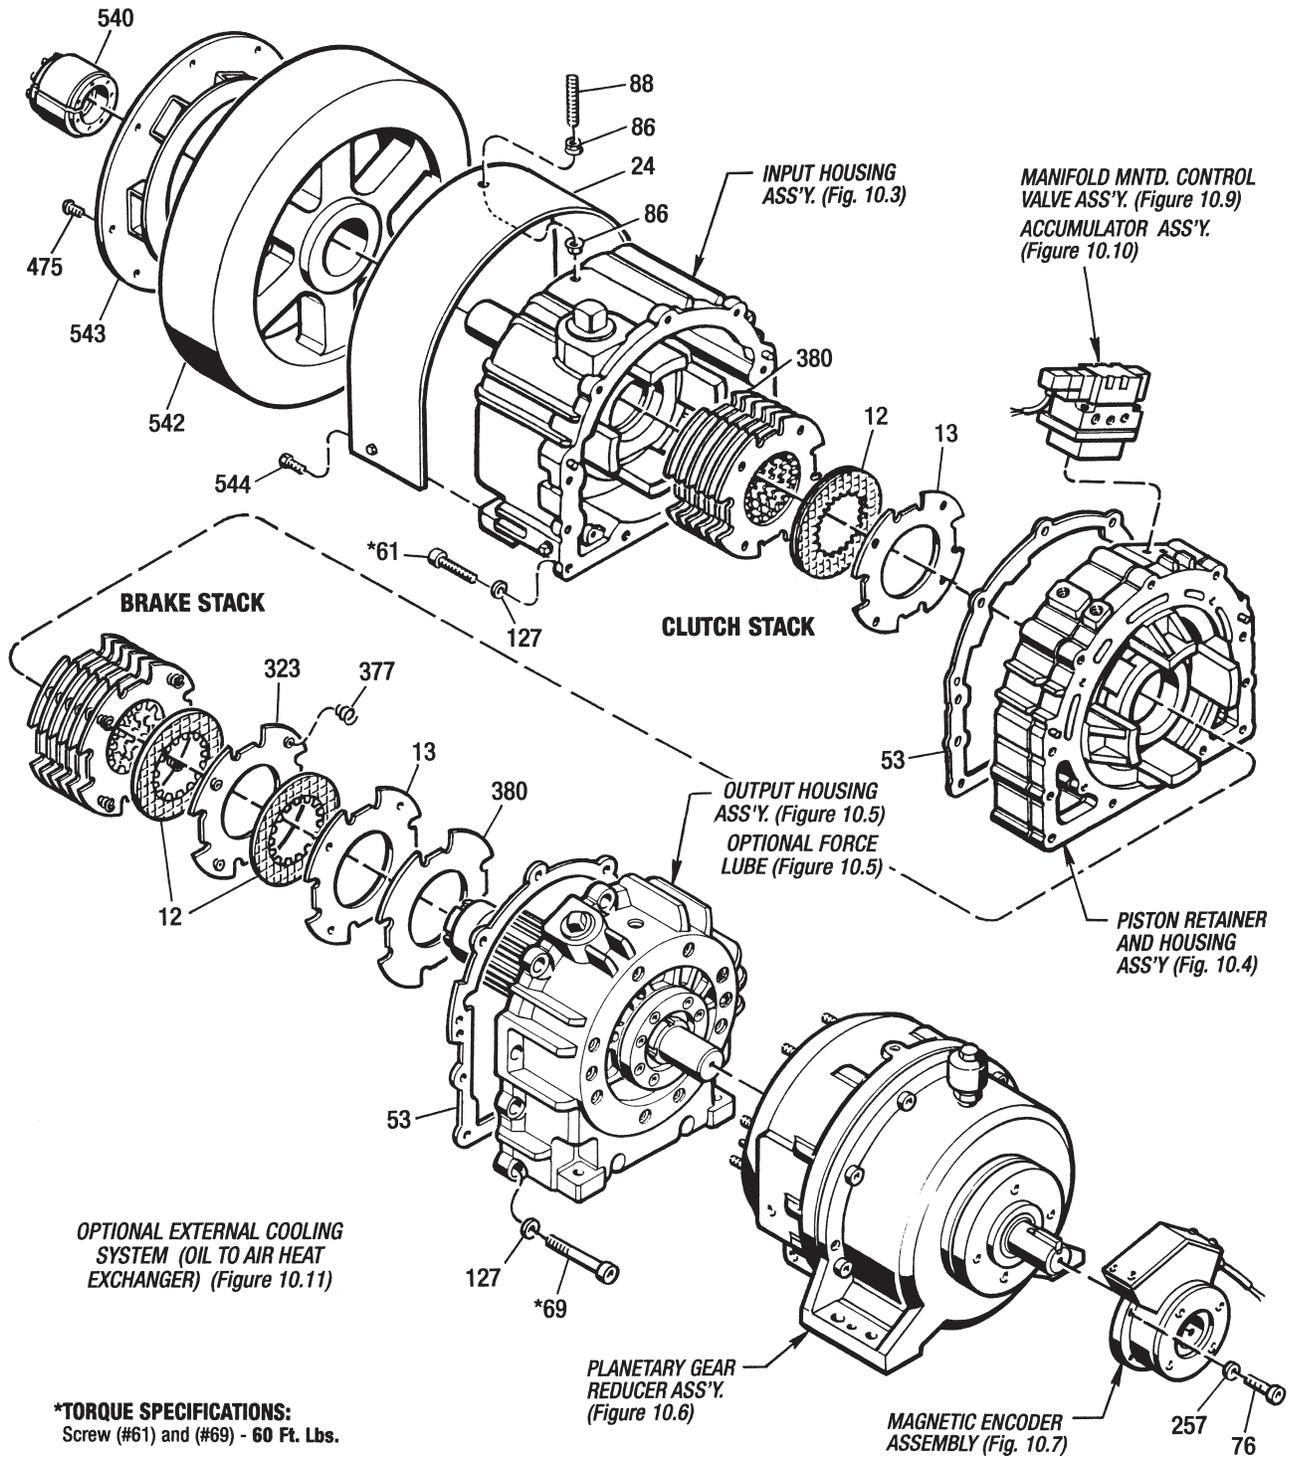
#20 Posidyne Indexing Drive (With Planetary Gear Reducer)
